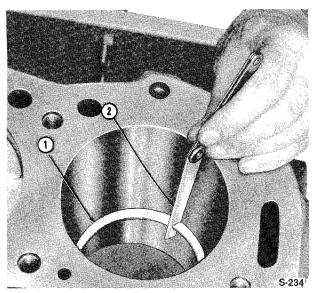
Measuring Piston Ring Gap 1. Piston Ring 2. Feeler Gauge
